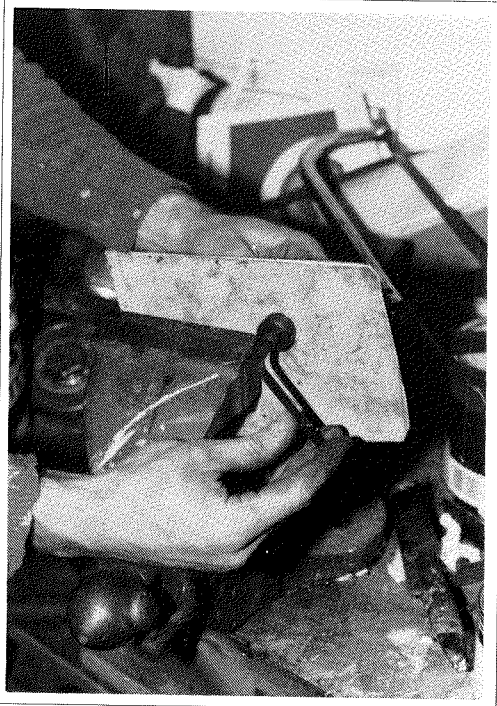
cut out a repair panel from sheet and then punch and drill any relevant holes...
